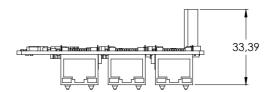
MIOe-220 Mechanical Drawing (Coastline)
